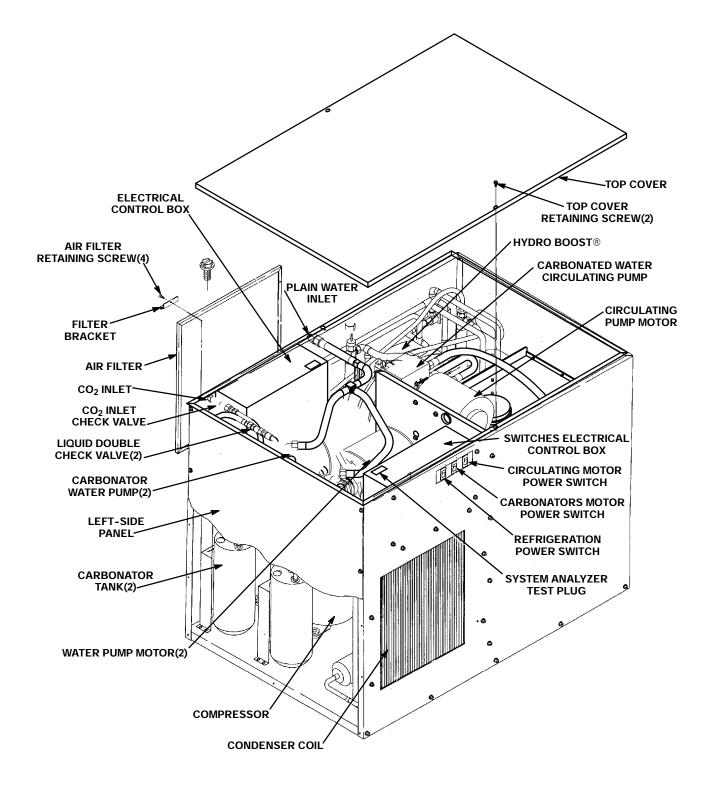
PARTS IDENTIFICATION (STANDARD COOLING UNIT W/INTERNAL CONDENSER COIL AND FAN ASSEMBLY)
